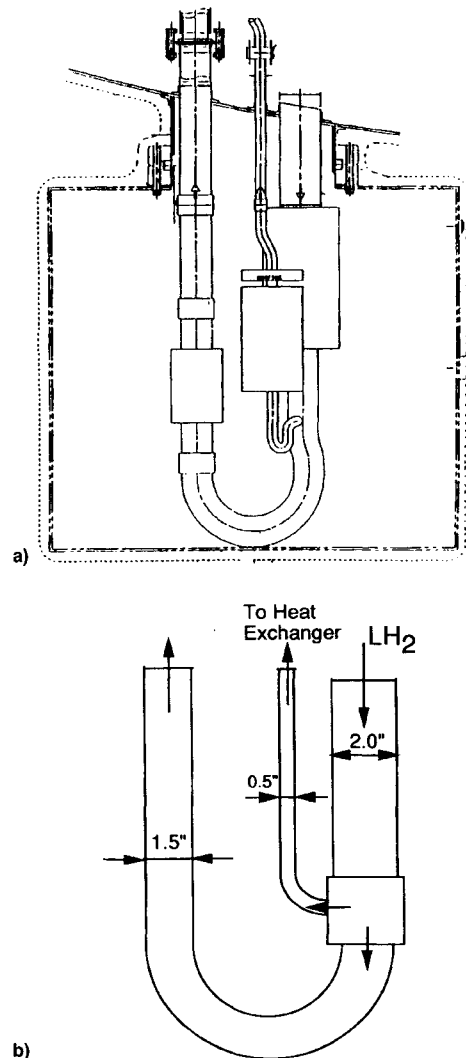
Cross-sectional view of the recirculation pump system: a) design geometry and b) illustration sketch.
